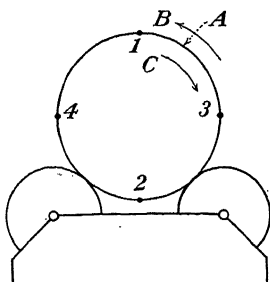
Pipe resting on rollers. A. Top shoulder of joint. B. Direction of welding. C. Direction of pipe movement. Numbers indicate order of tack welds.
